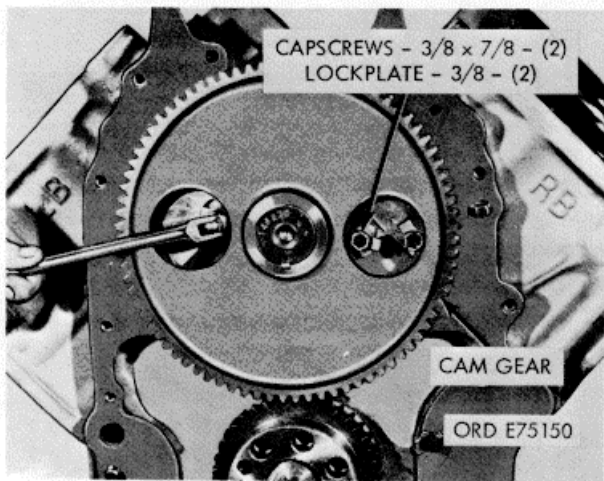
Camshaft, gear and spacer plate-removal/installation.
